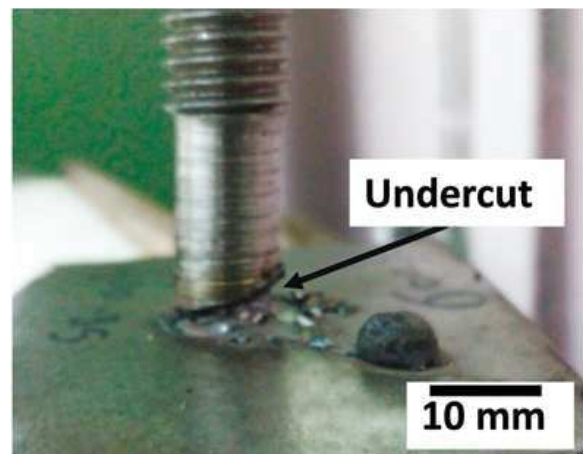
Weld undercut defect of 800 A and 0.4 s
